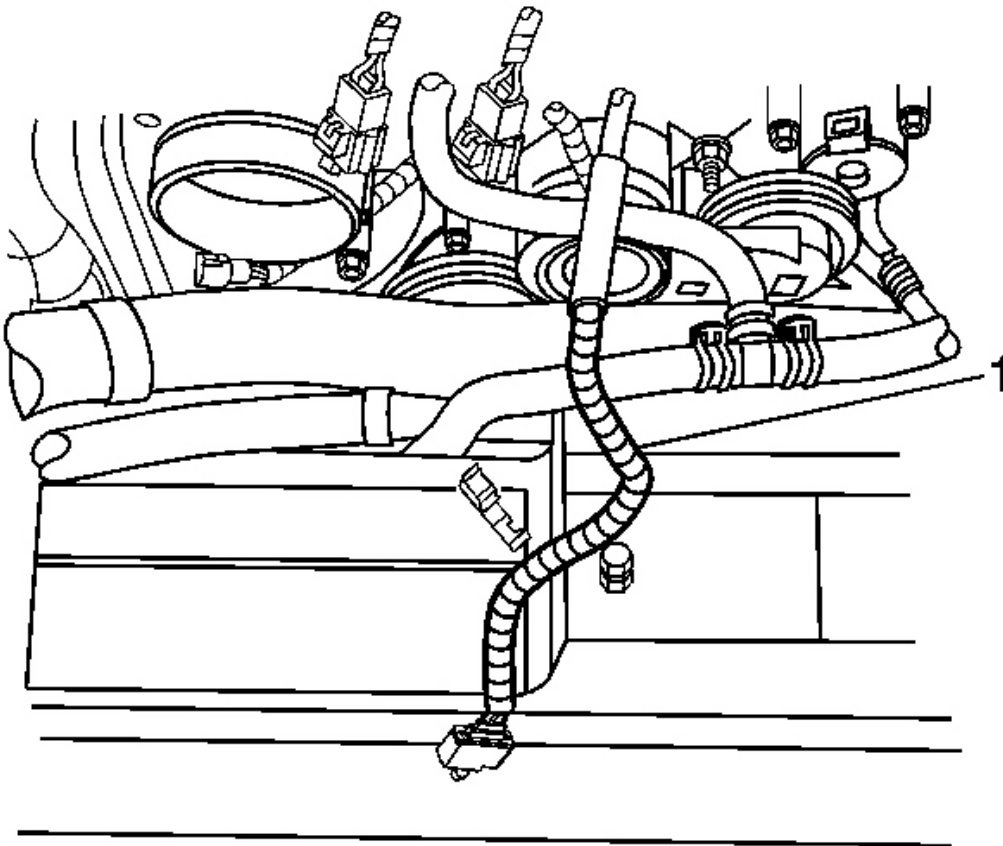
View Of Charge Air Cooler Coolant Outlet Hose
